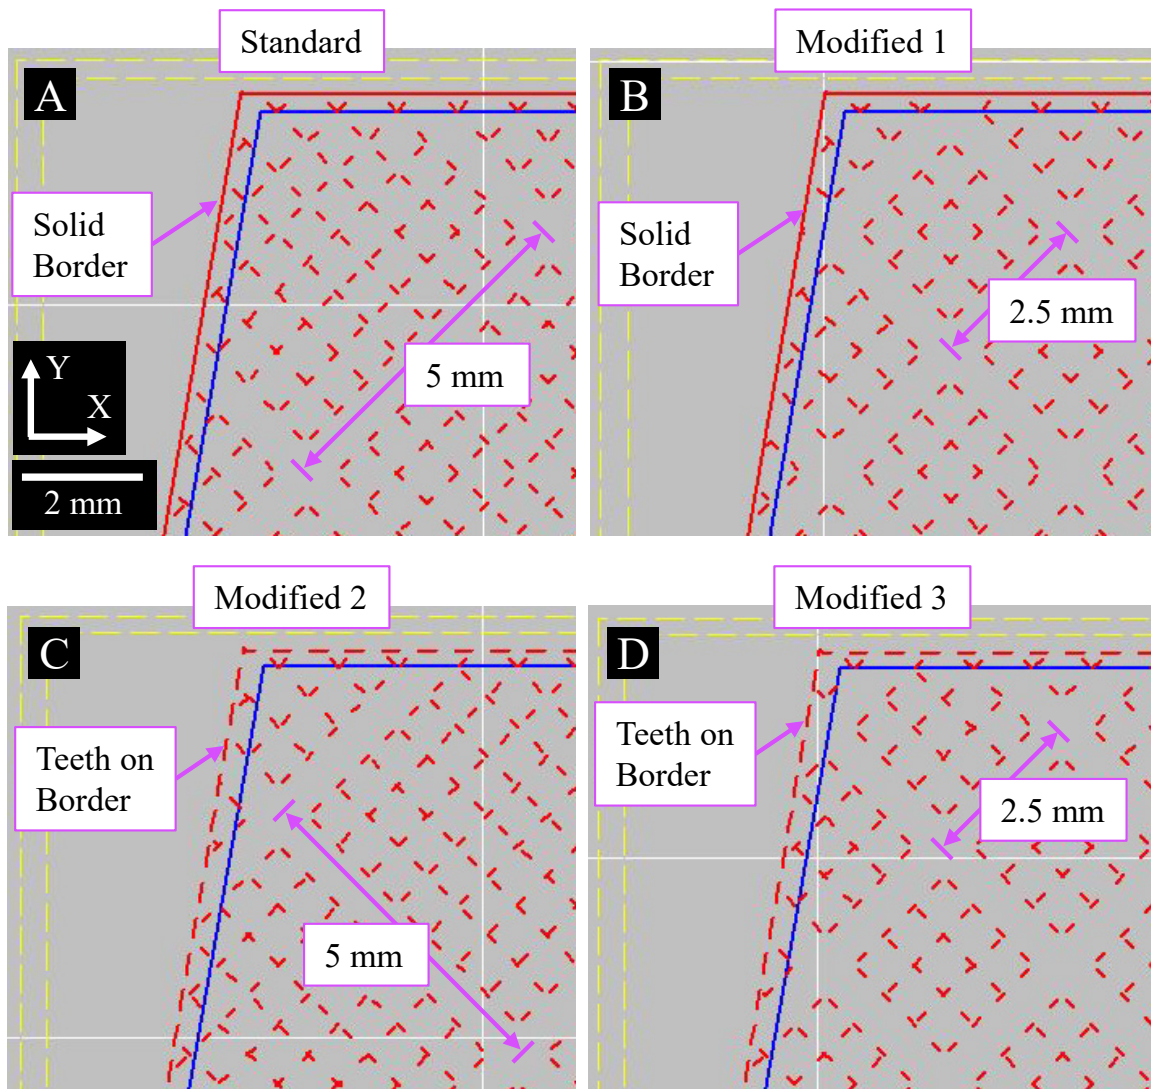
CAD image of the compressor blade section printed in this work (in grey) with the supports in red.
